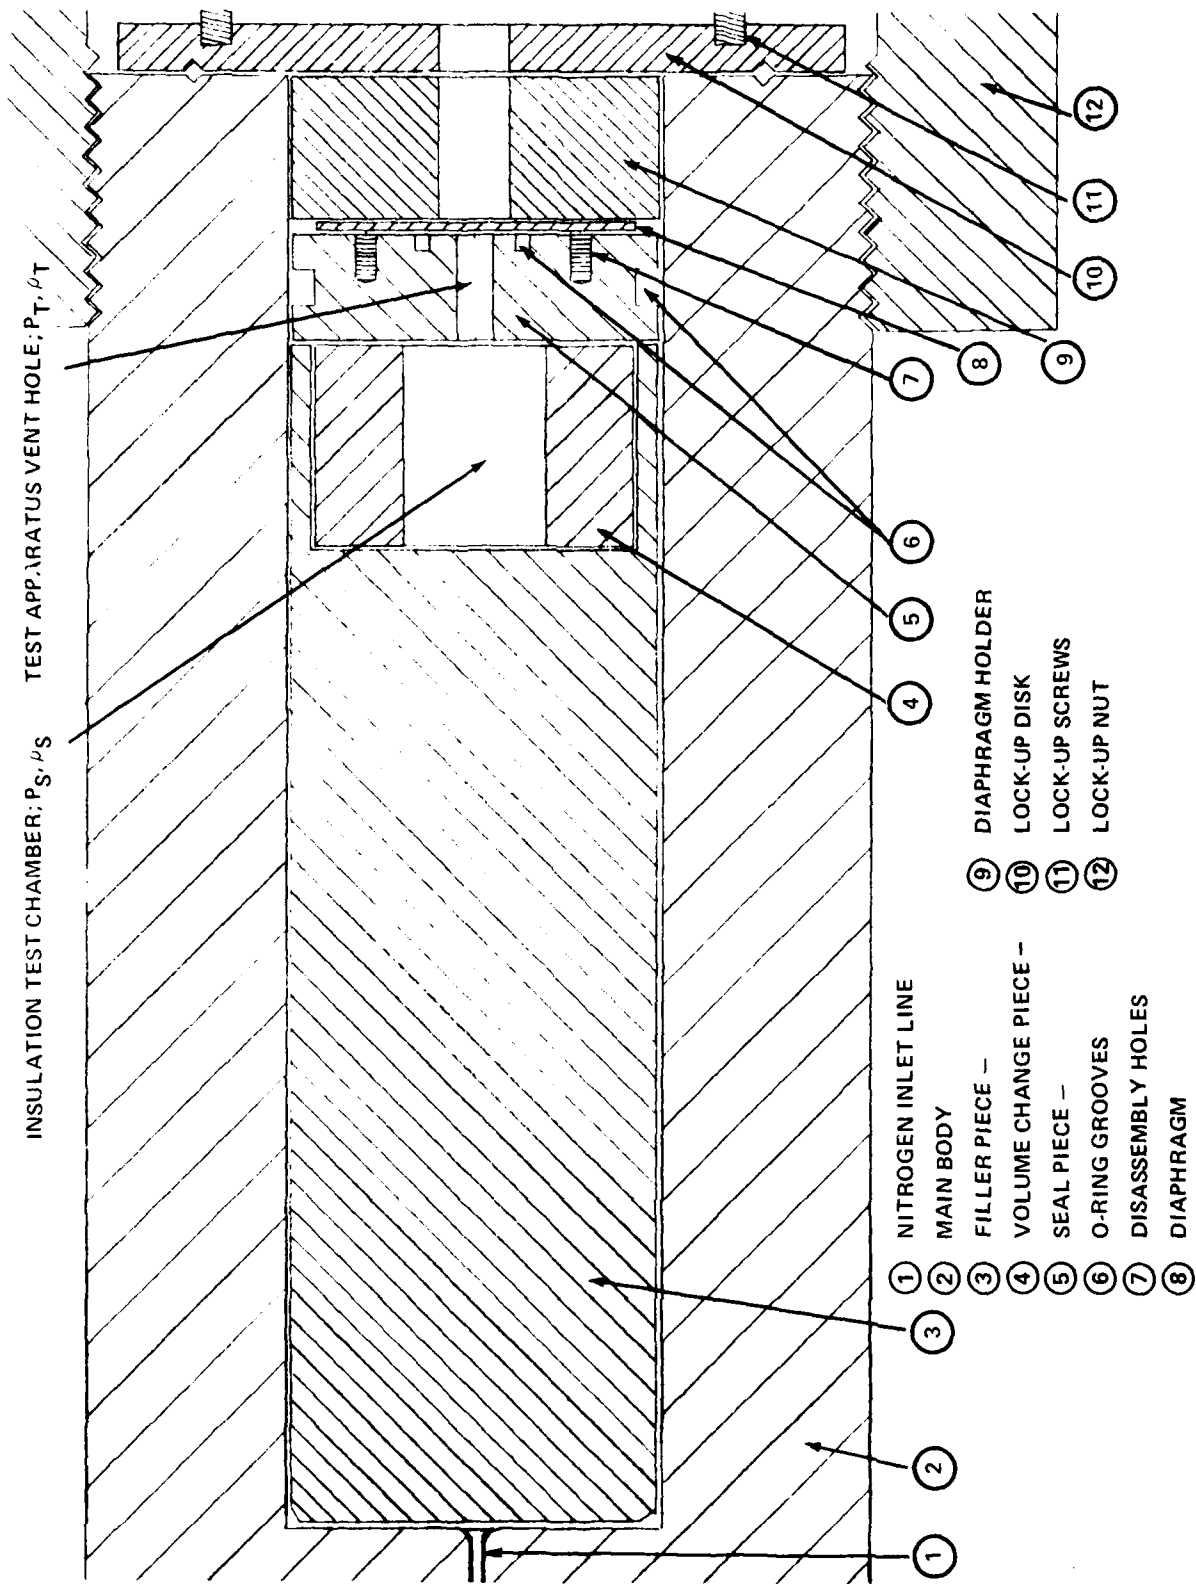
CROSS SECTION VIEW OF INSULATION TEST APPARATUS
